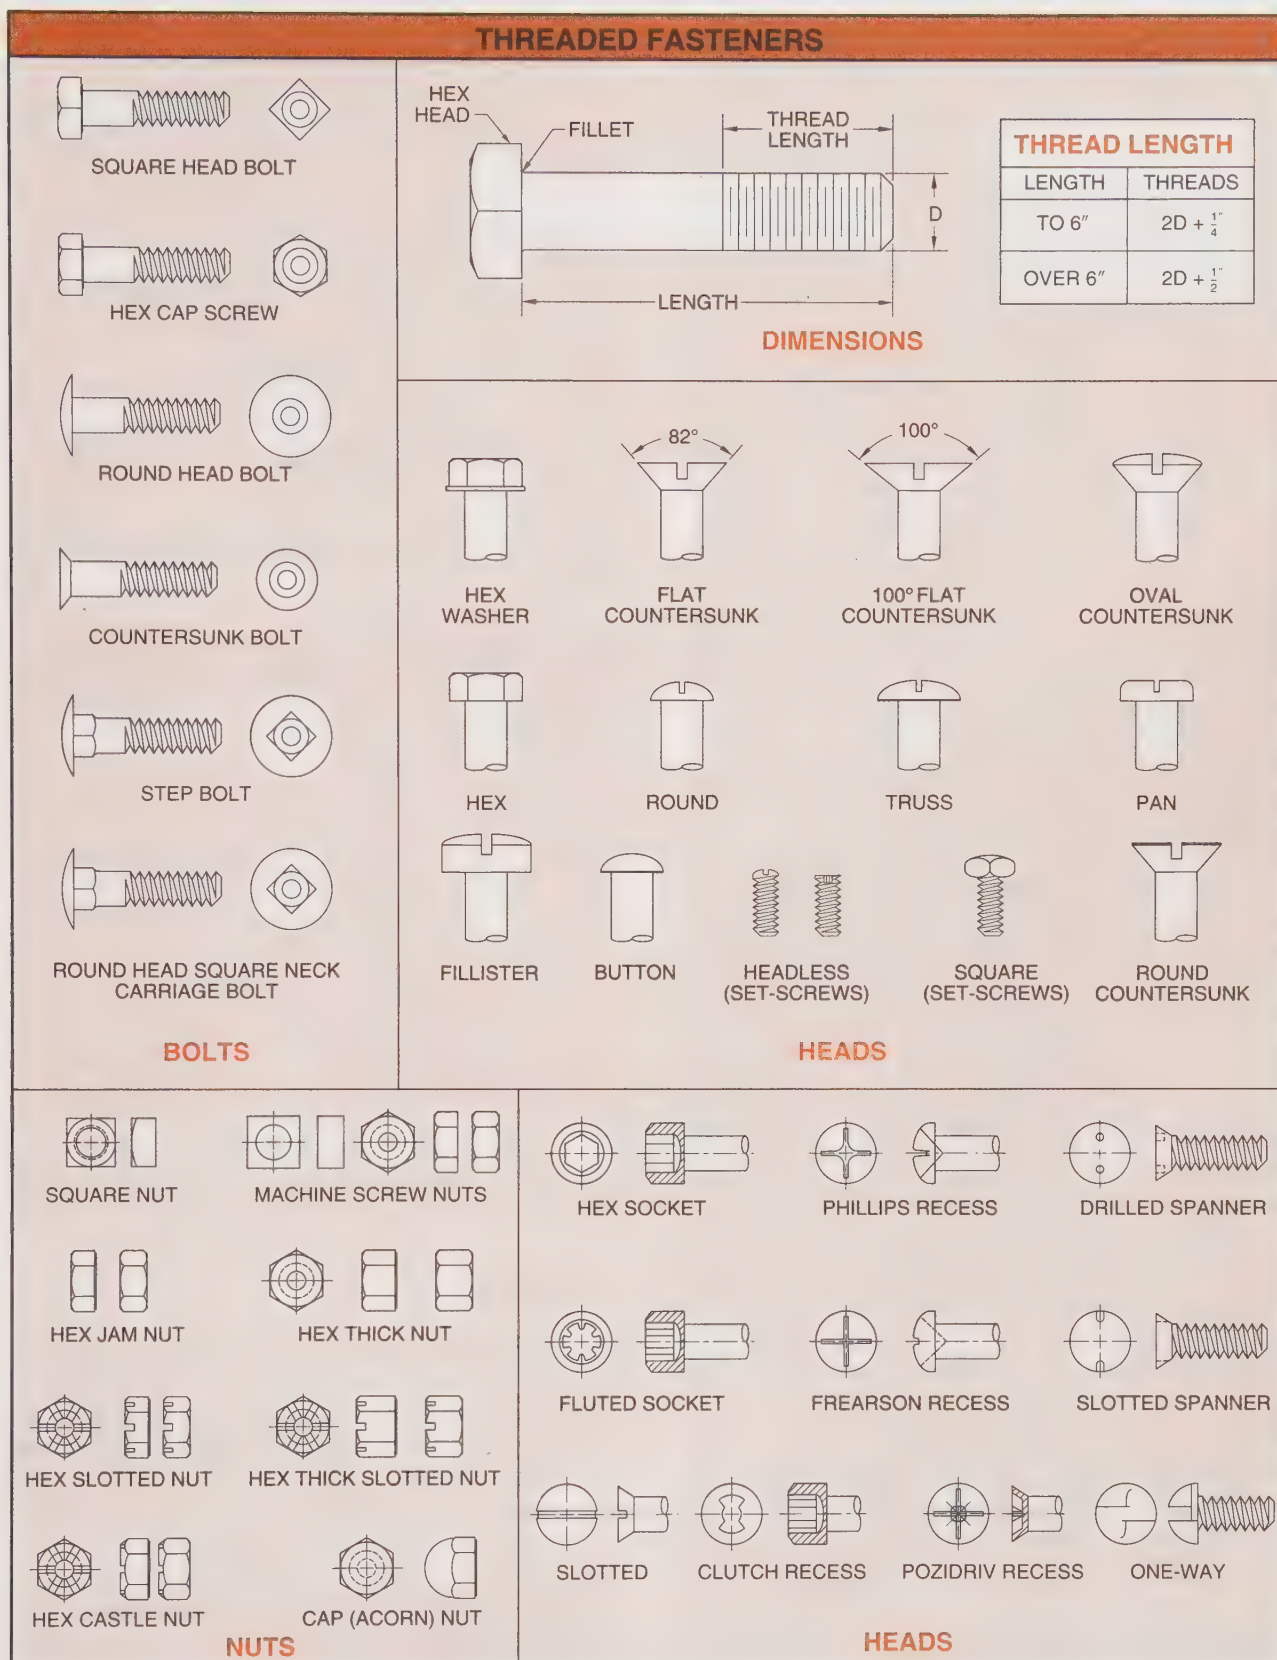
Bolts, screws, and nuts are threaded fasteners.
